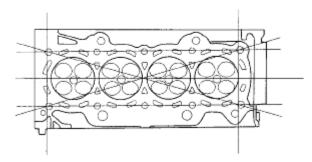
Checking Cylinder Head Warpage Courtesy of AMERICAN HONDA MOTOR CO., INC.
